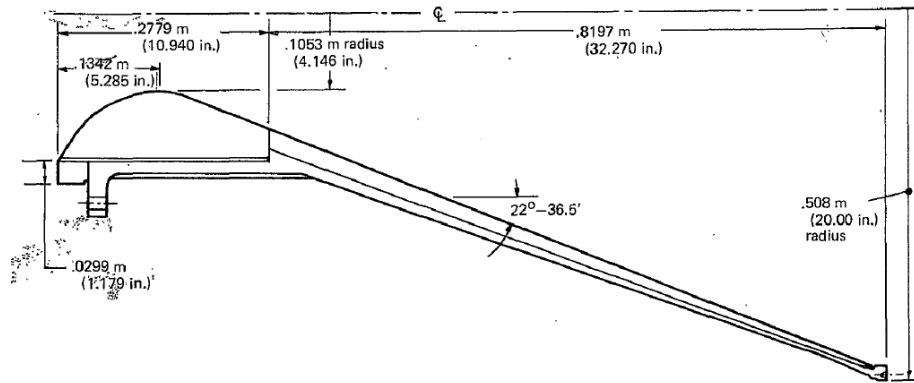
Dimensions of the Castor II[Shields, 1976] nozzle
